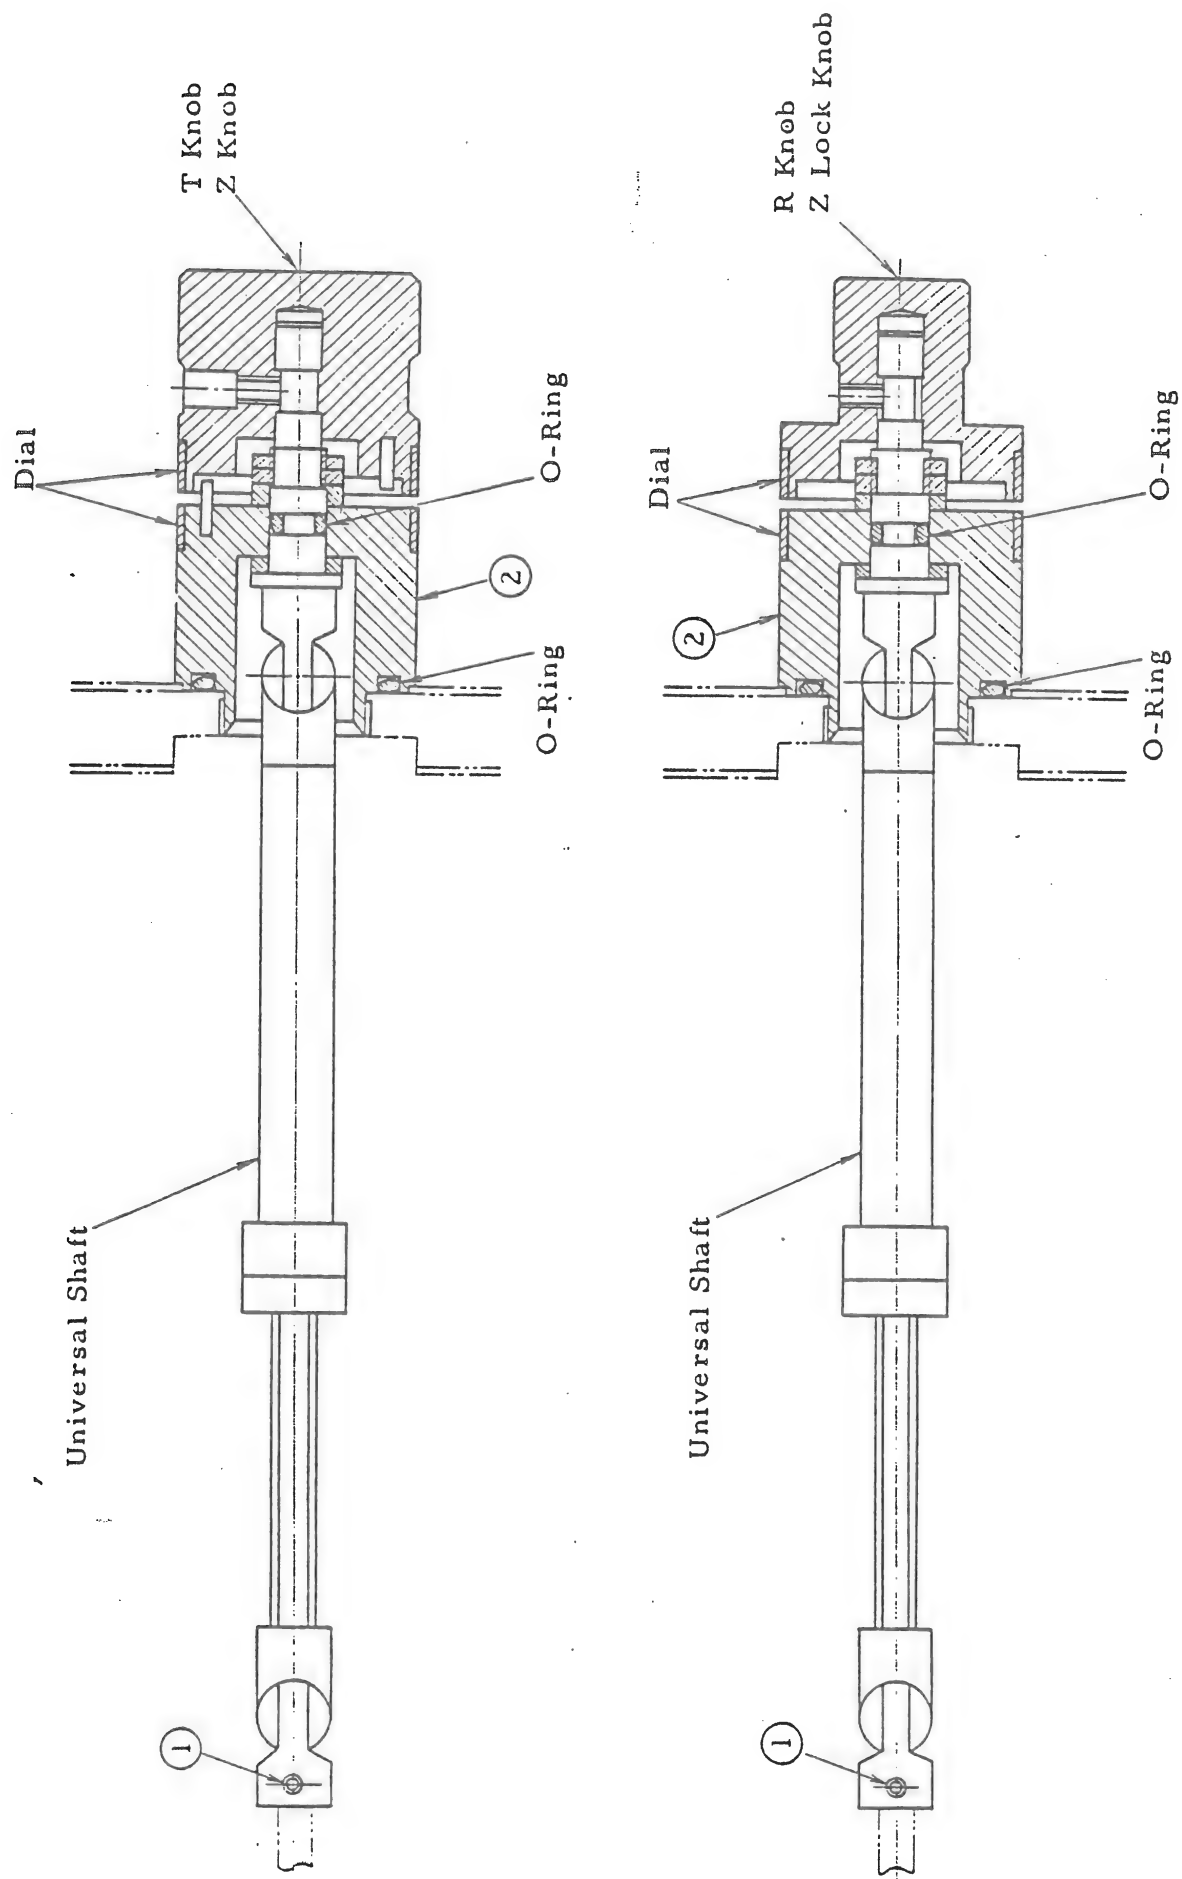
Construction of T, R, Z, and Z Lock Knobs and Drive Shaft
